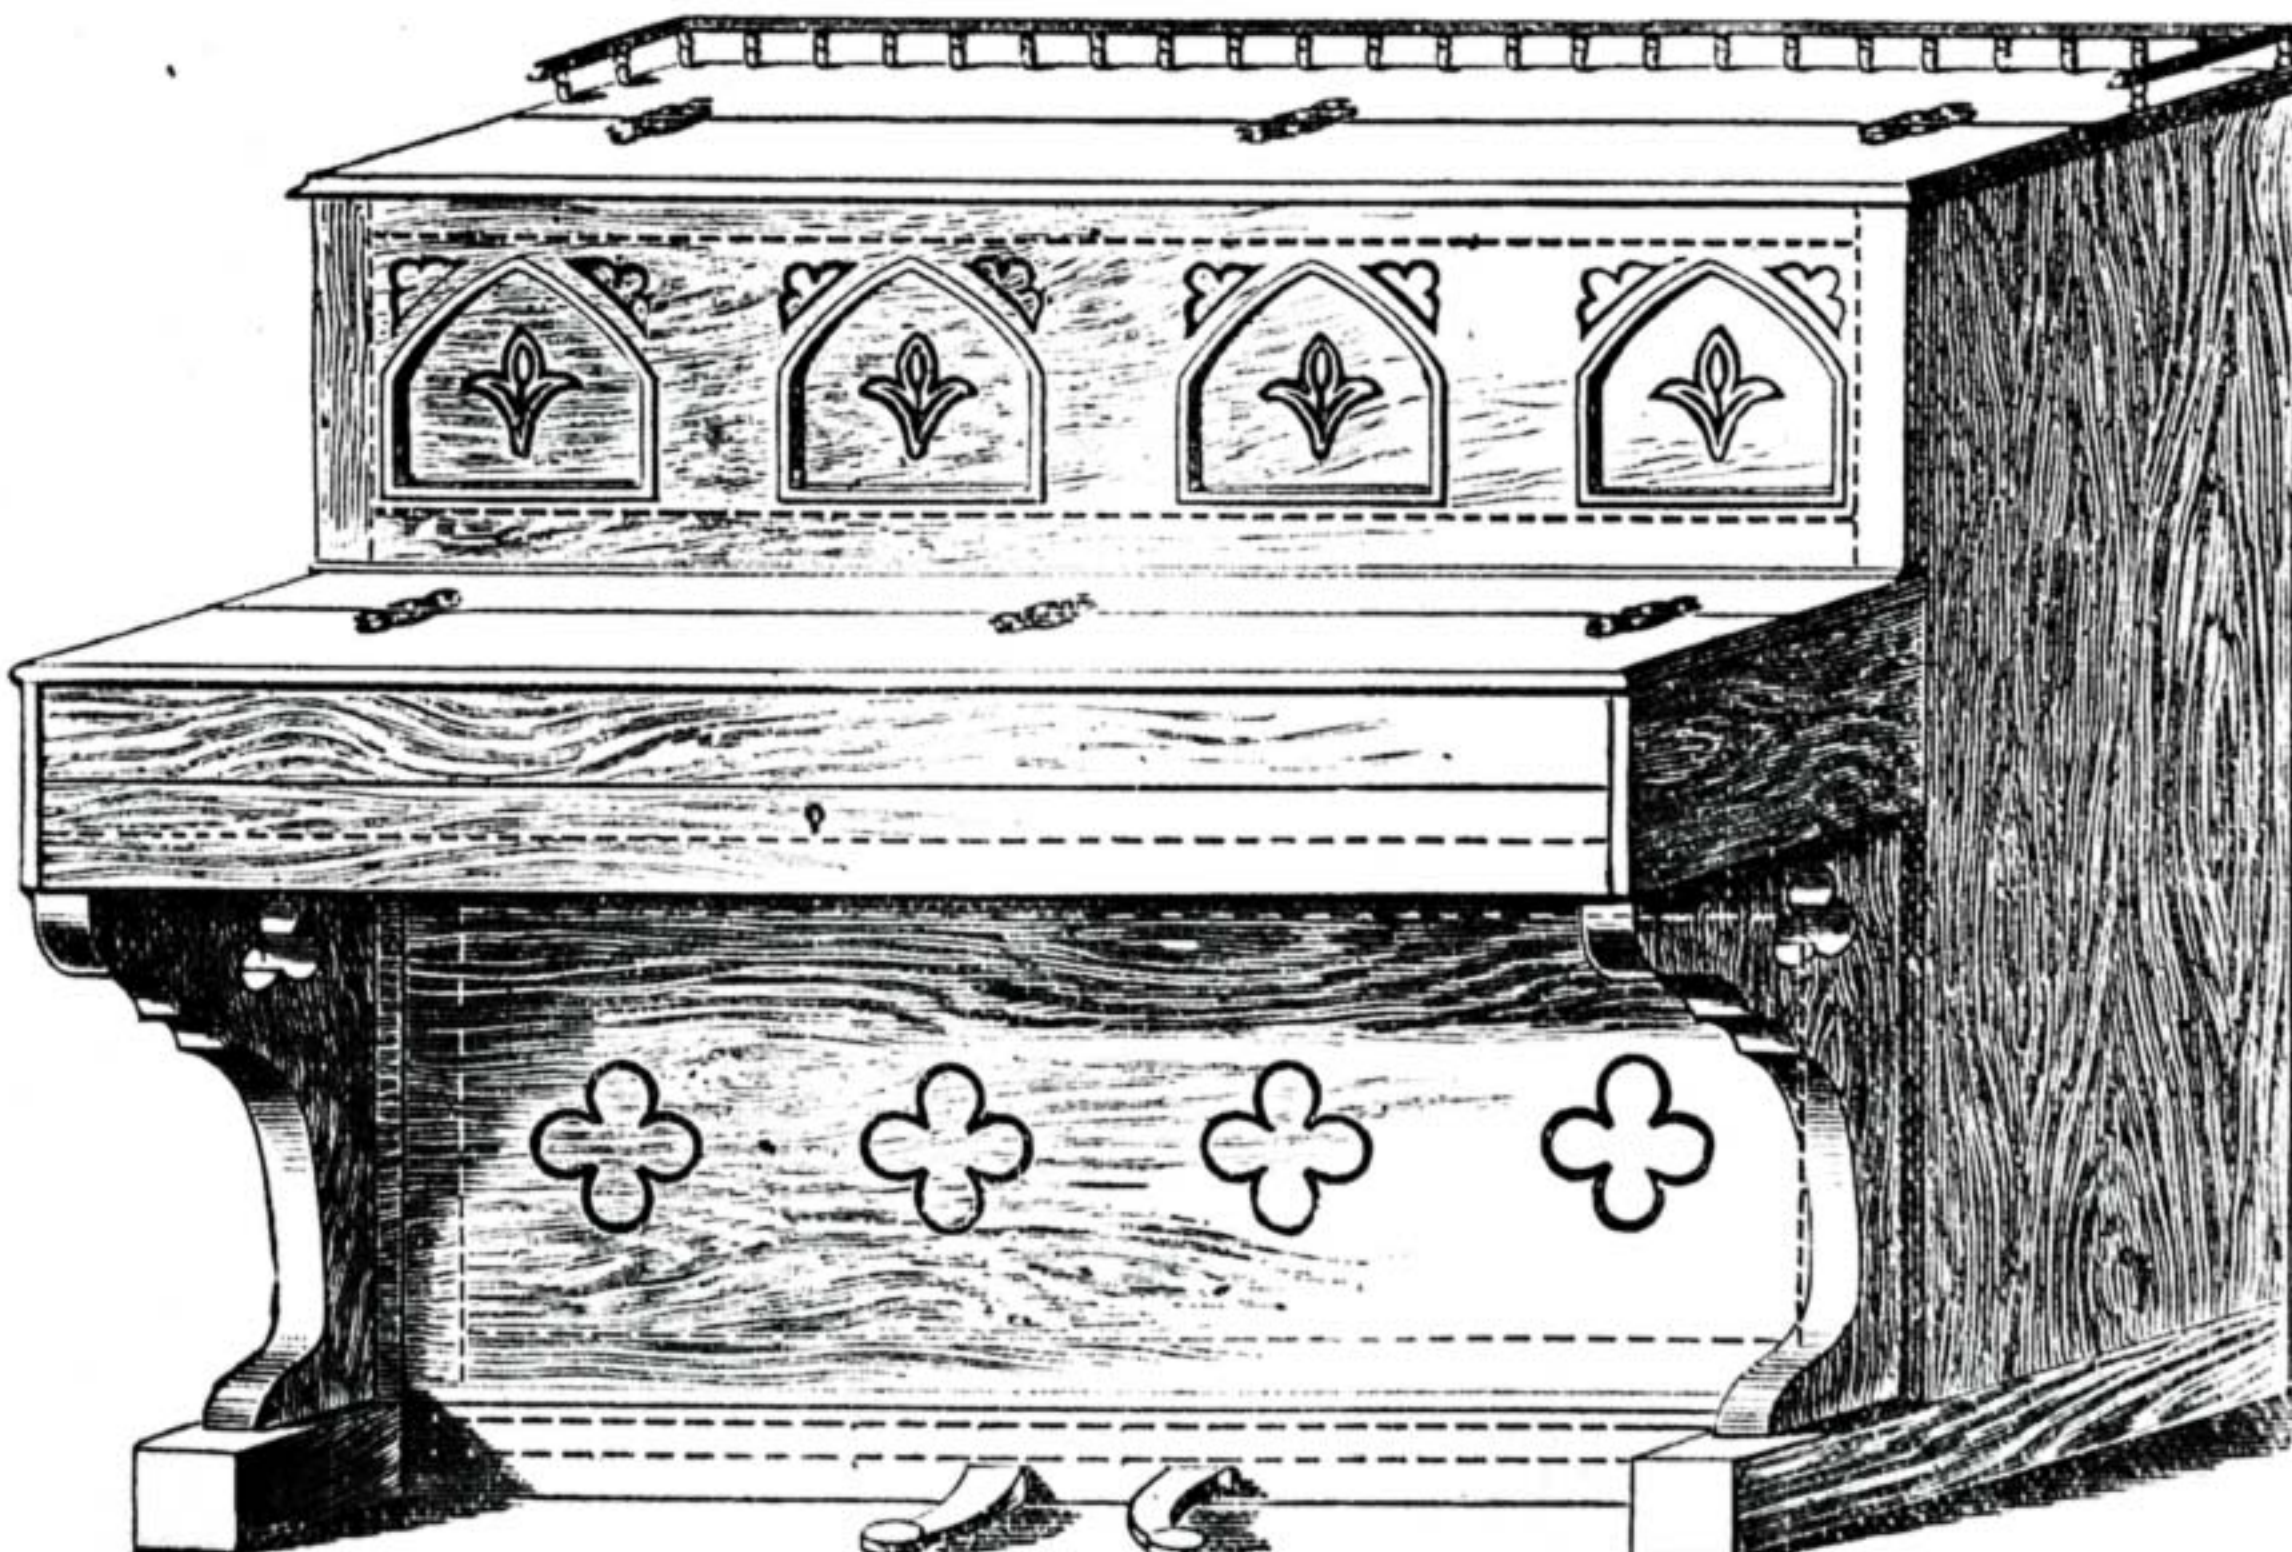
Case in Isometrical Perspective, Dotted Lines showing Top and Bottom Doors, Front of Key Bottom, and Bottom Board.
